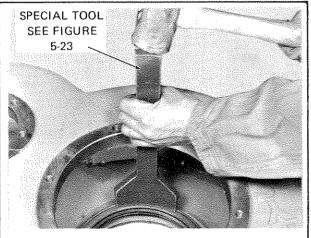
Installation of Drum and Drum Shaft (Sheet 3 of 3)
